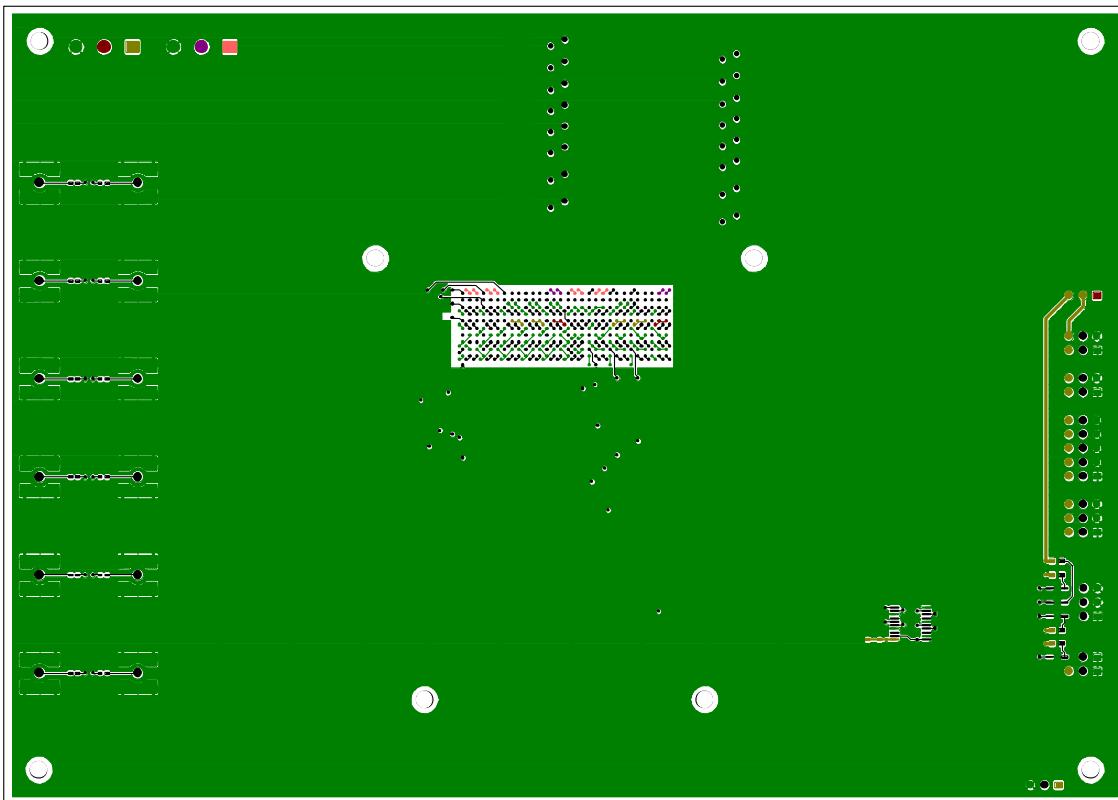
Layer 1—Component Side (Loopback Motherboard)
